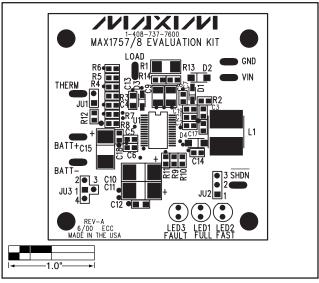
MAX1757/MAX1758 EV Kit Component Placement Guide—Component Side
